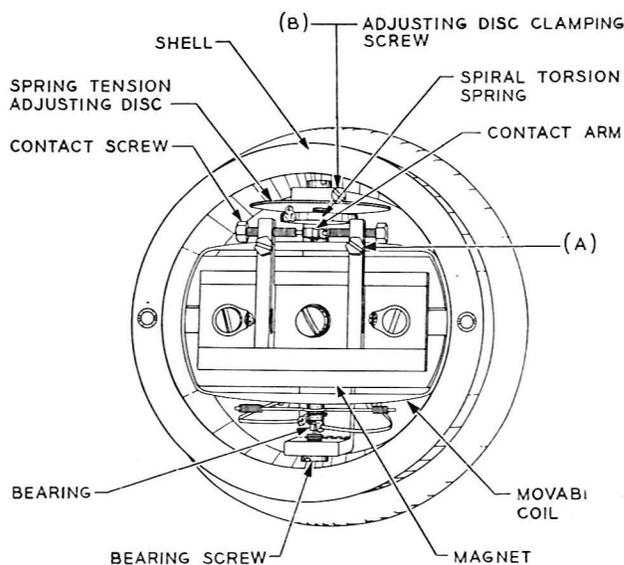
260 TYPE RELAY - COVER REMOVED
